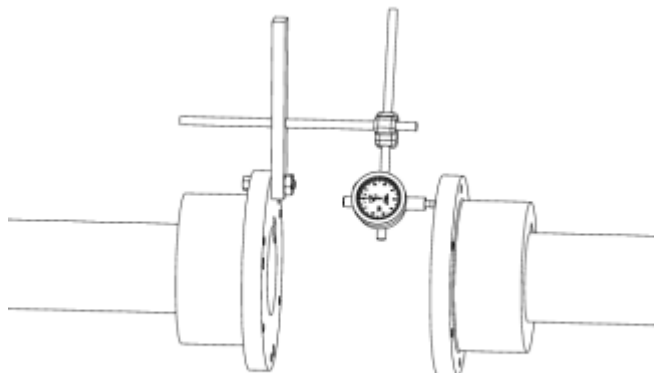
Checking angular alignment with dial indicator on coupling face.
